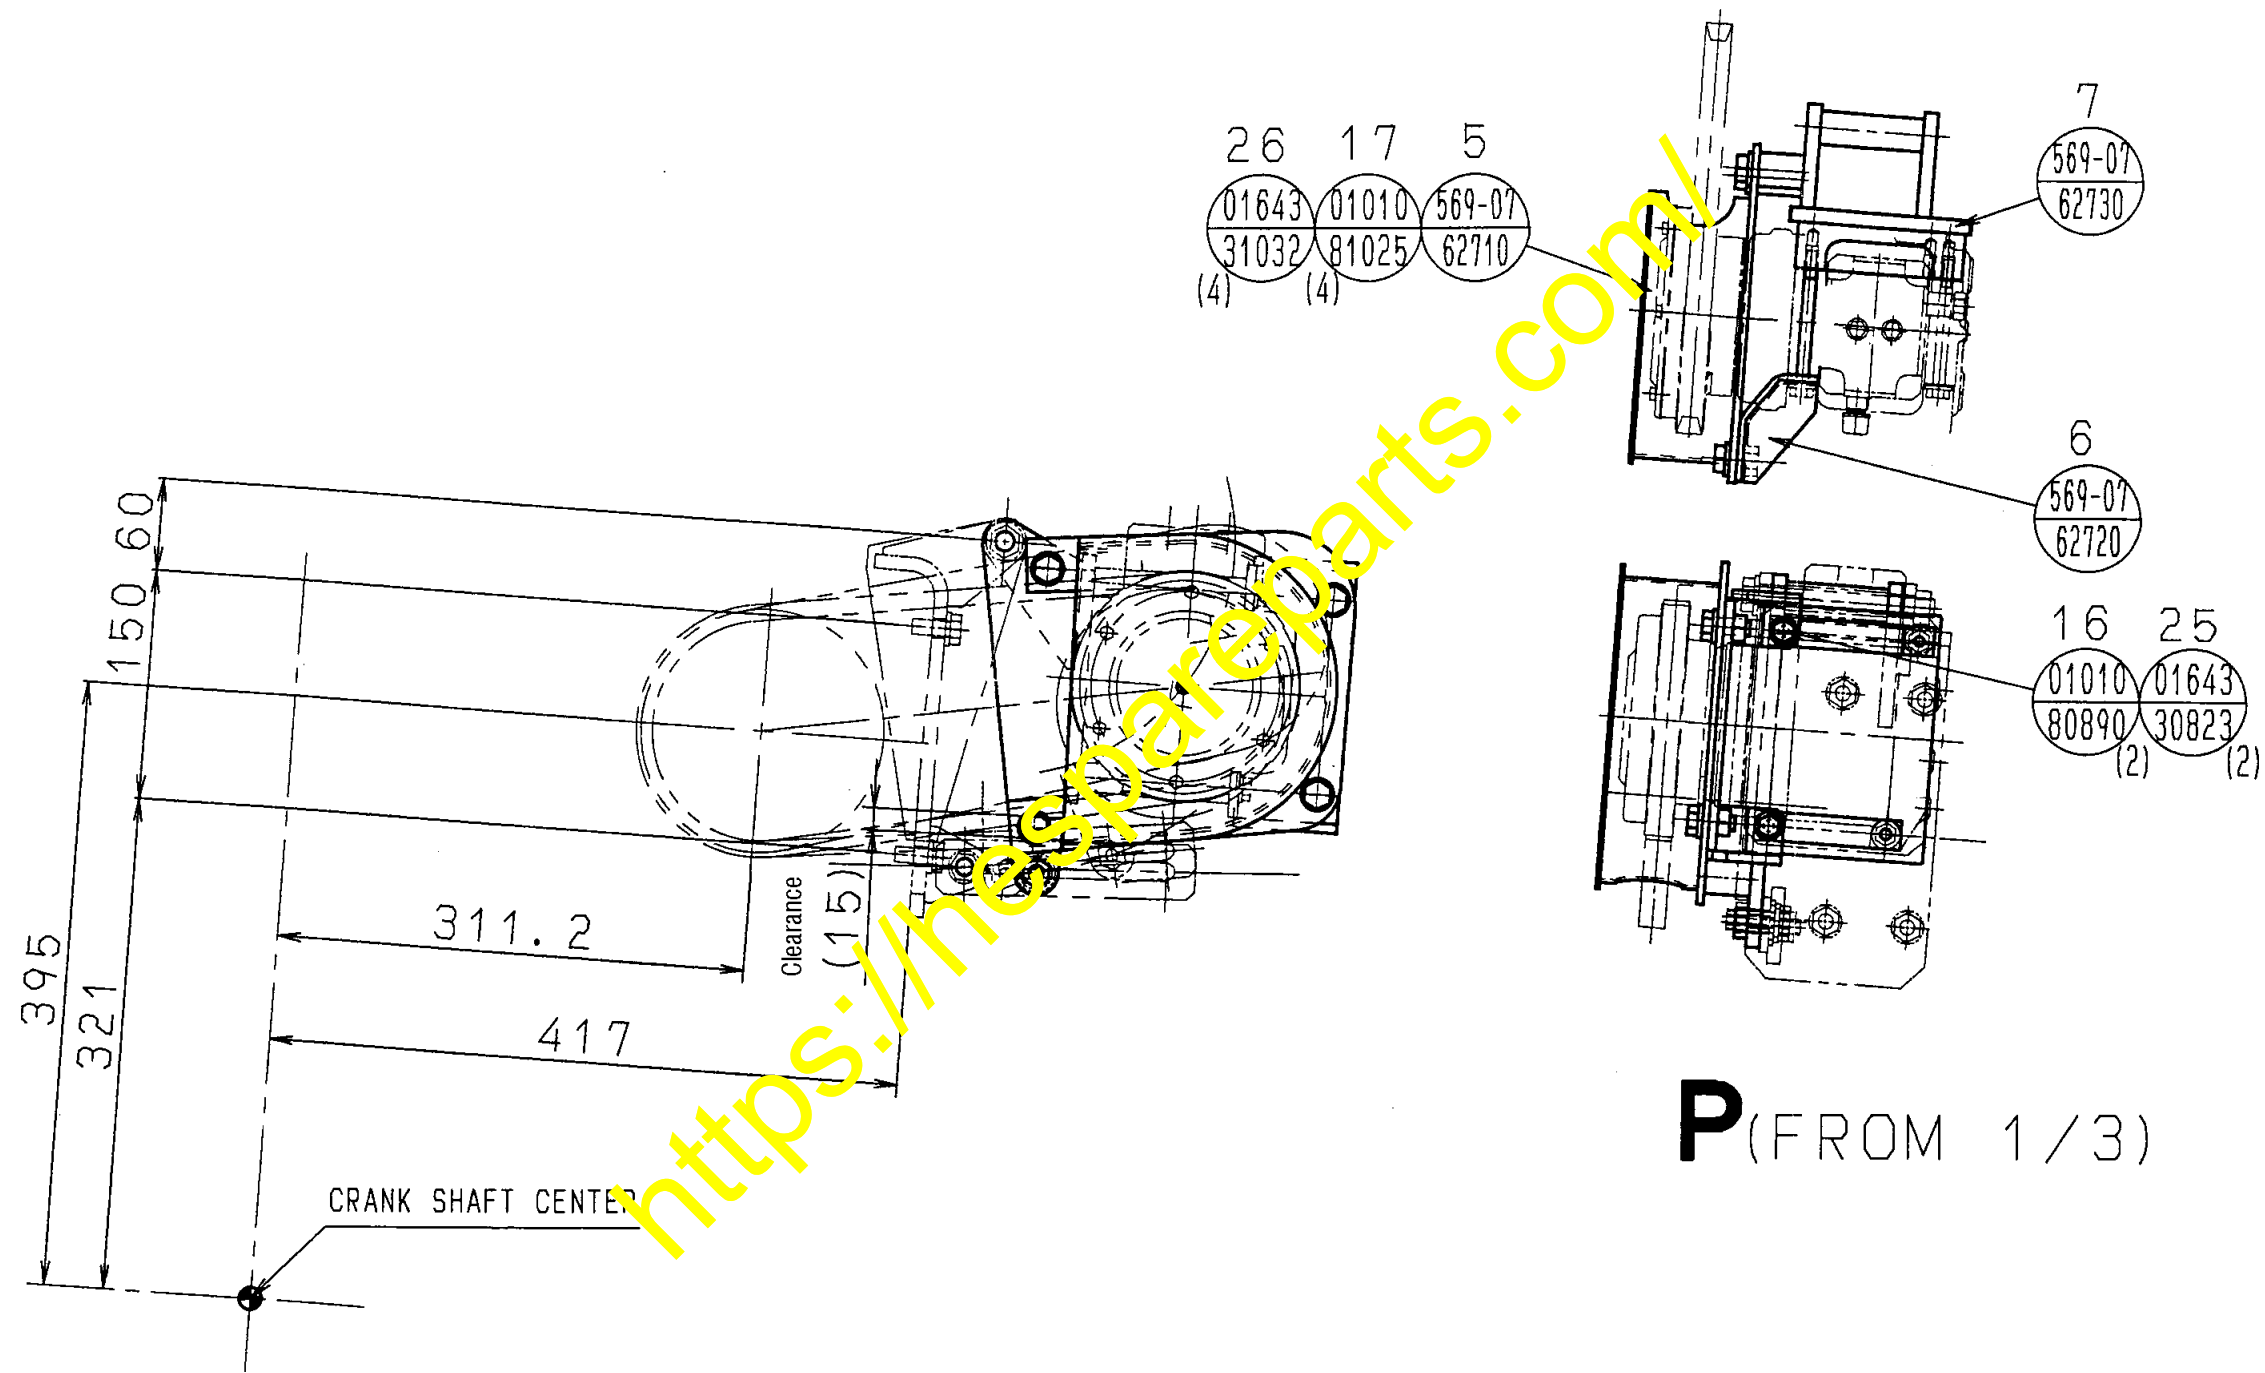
Installing the fan belt cover and the air conditioner compressor cover (3/3)
